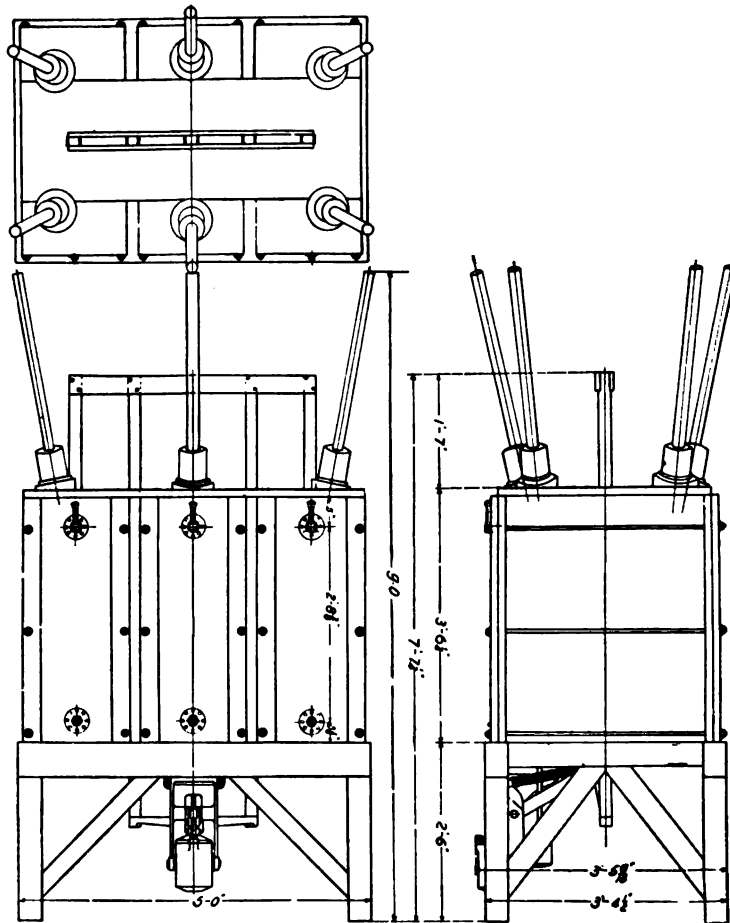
60,000-volt top-connected breaker with sheet-metal tanks
